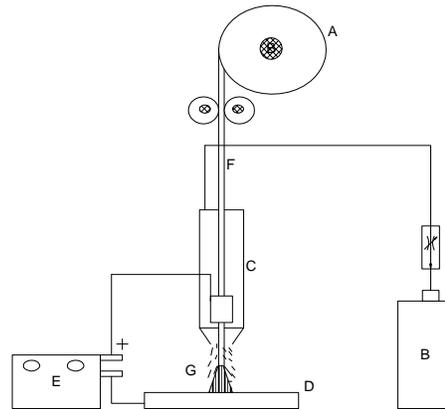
Schematic of GMAW process showing important elements A) Welding spool, B) Shielding gas cylinder, C) welding torch, D) base plate, E) welding power source, and F) consumable electrode.
